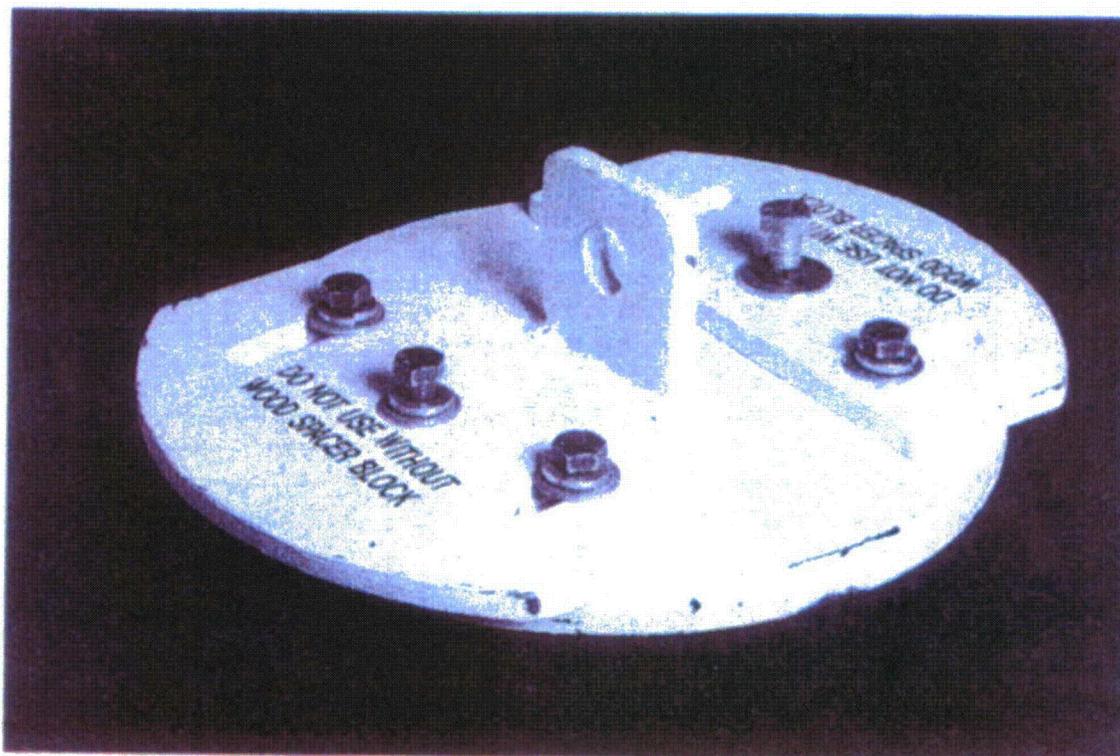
Manually Adjustable Lifting Fixture for Test Canisters
